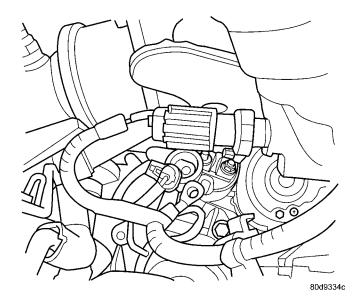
ELECTRICAL CONNECTIONS REMOVED
